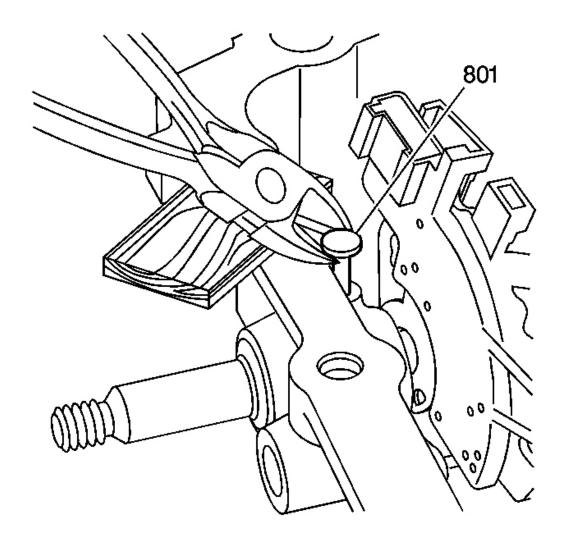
Removing Manual Shift Shaft Pin Courtesy of GENERAL MOTORS CORP.
